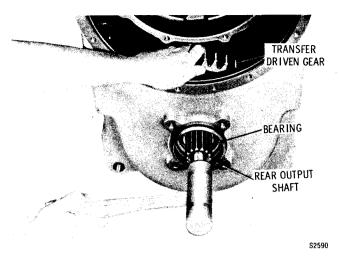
Seating rear output shaft in housing (-1 models with two-piece or rear output shaft)
